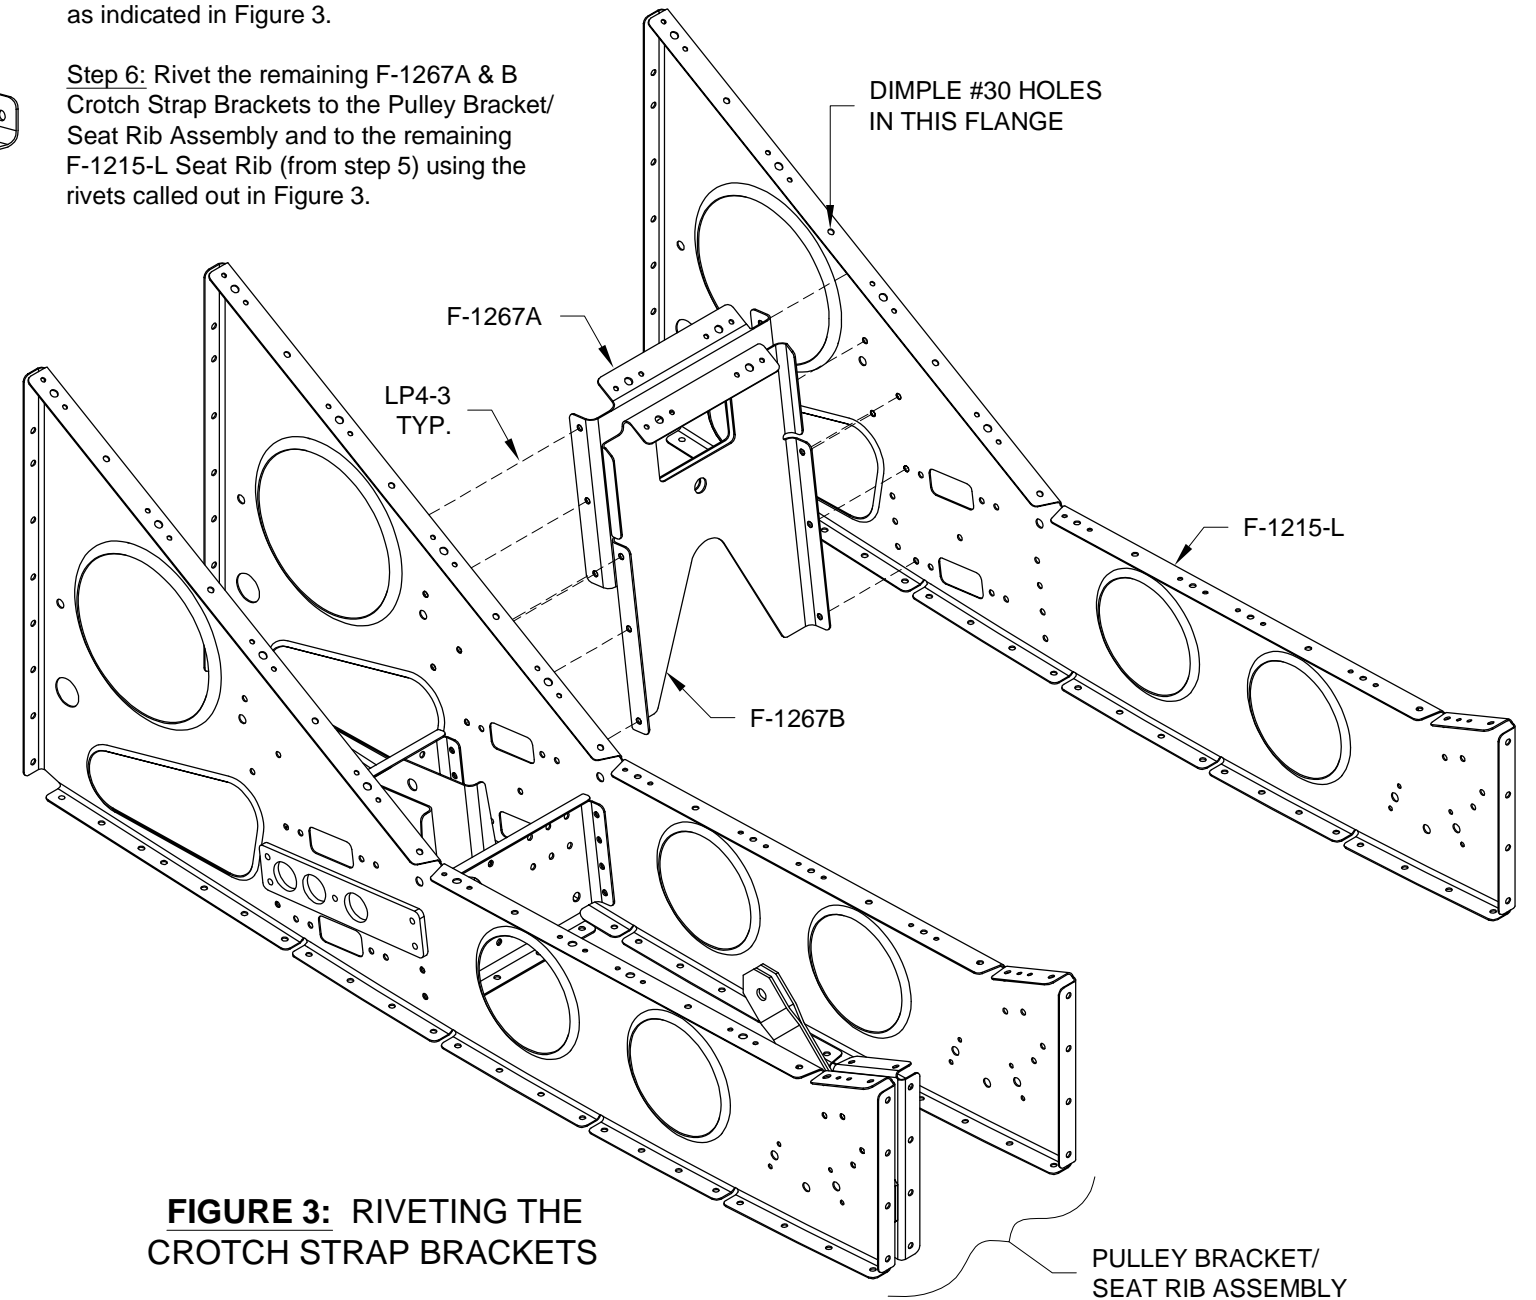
RIVETING THE CROTCH STRAP BRACKETS
